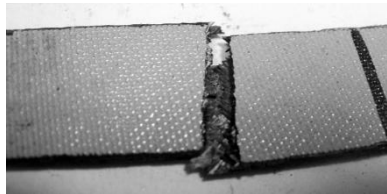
Lower skin. The form and place destruction of the elevator's additional composite samples in the result of stretch-test
